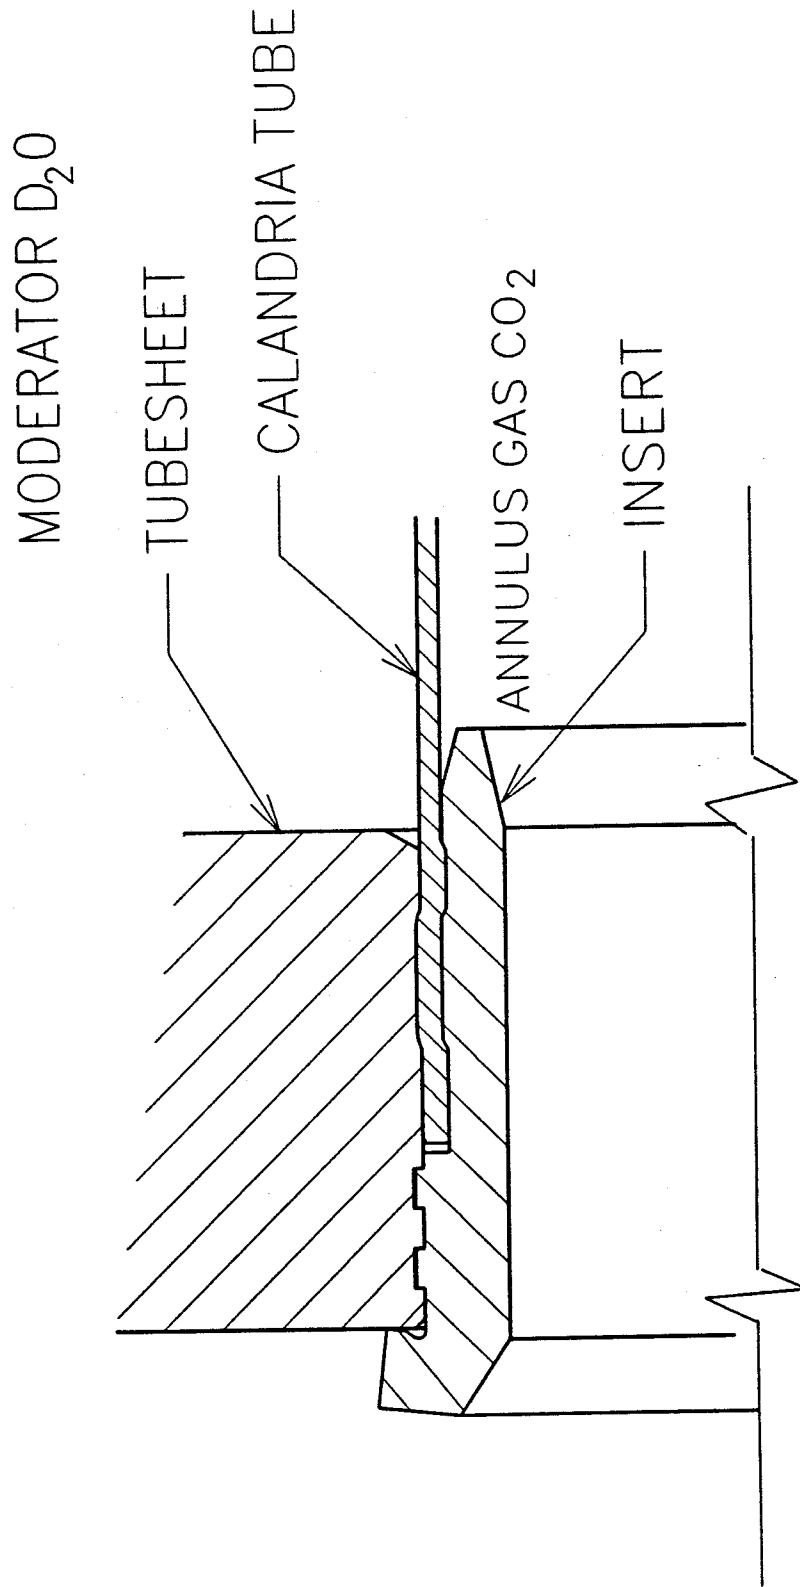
Calandria Tube-to-Tubesheet Joint - After Roll-Expansion
